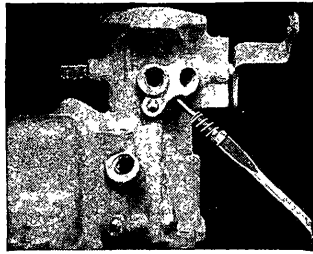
Install idle adjustment screw and spring. Back out from seated position to specifications as given in Carter Specifications table
